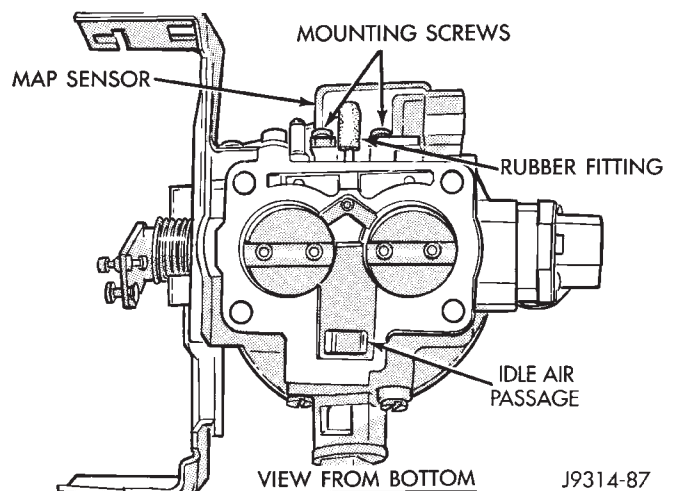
MAP Sensor L-Shaped Rubber Fitting
